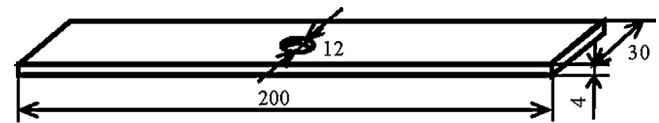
Geometry of test specimen (all dimensions quoted in mm).
